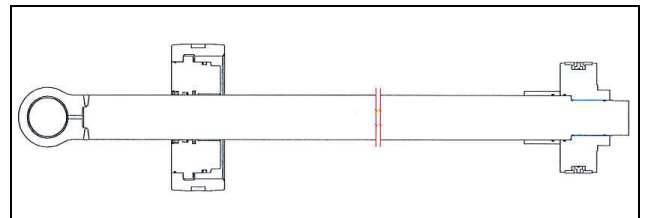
Piston, Head and Barrel Cap Disassembly (Tower Lift Cylinder)
